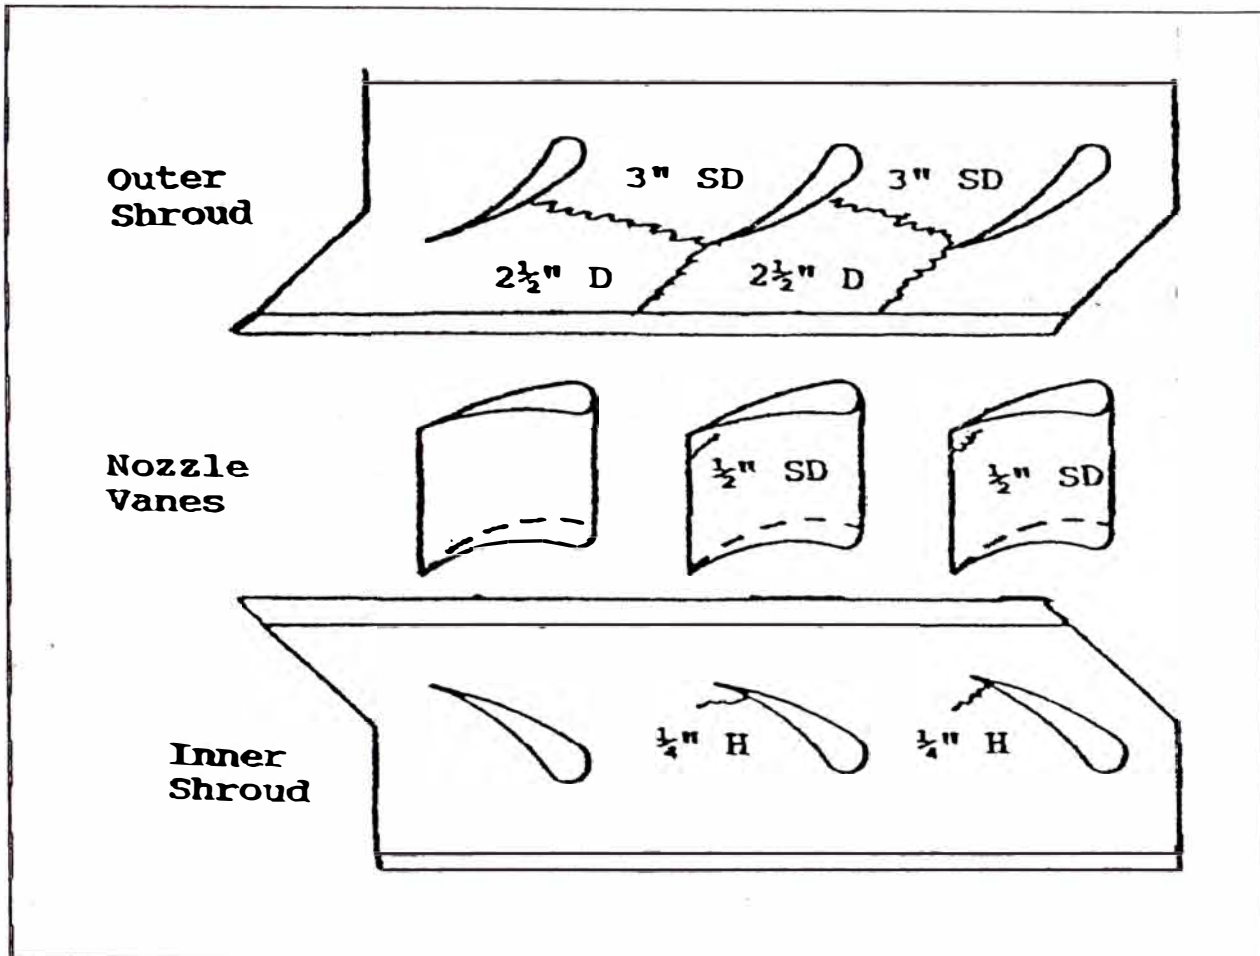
Sketch of cracking found during hot-section inspection in three-vane turbine nozzle segment in a heavy-duty industrial gas turbine.
